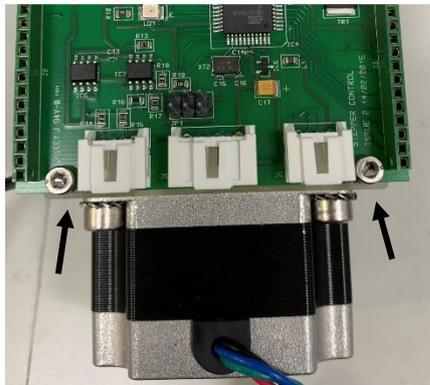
The control PCB was fixed to the valve housing with two M3 screws.
